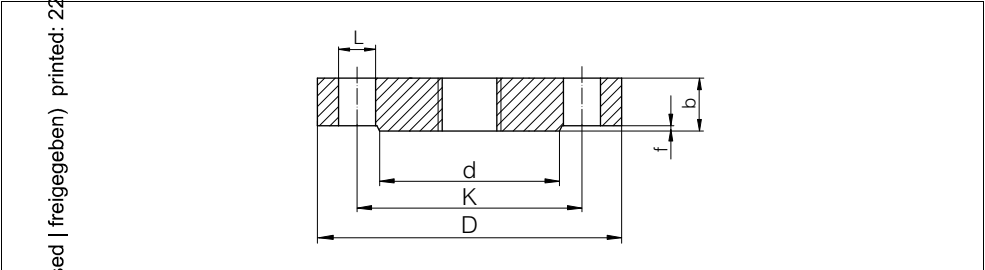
Dimensions - DIN flange DIN 2501 (seal ledge DIN 2526 Form C)
